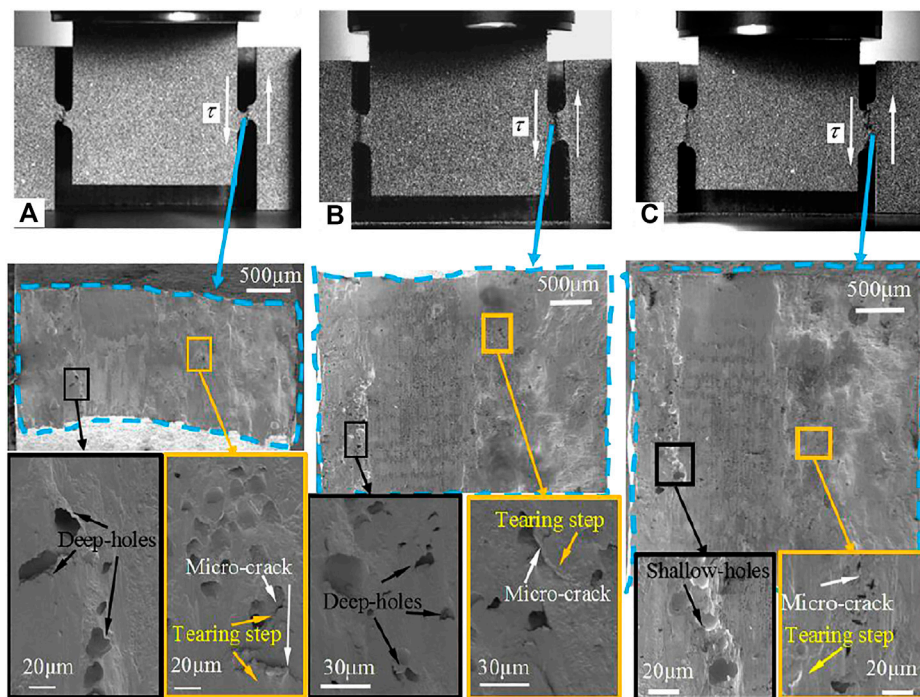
| SEM images of the fracture surface of weld specimens with different welding lengths under dynamic test conditions: (A) 2 mm weld specimen (2000 s^{-1}), (B) 4 mm weld specimen (3000 s^{-1}), and (C) 6 mm weld specimen (4000 s^{-1}).
